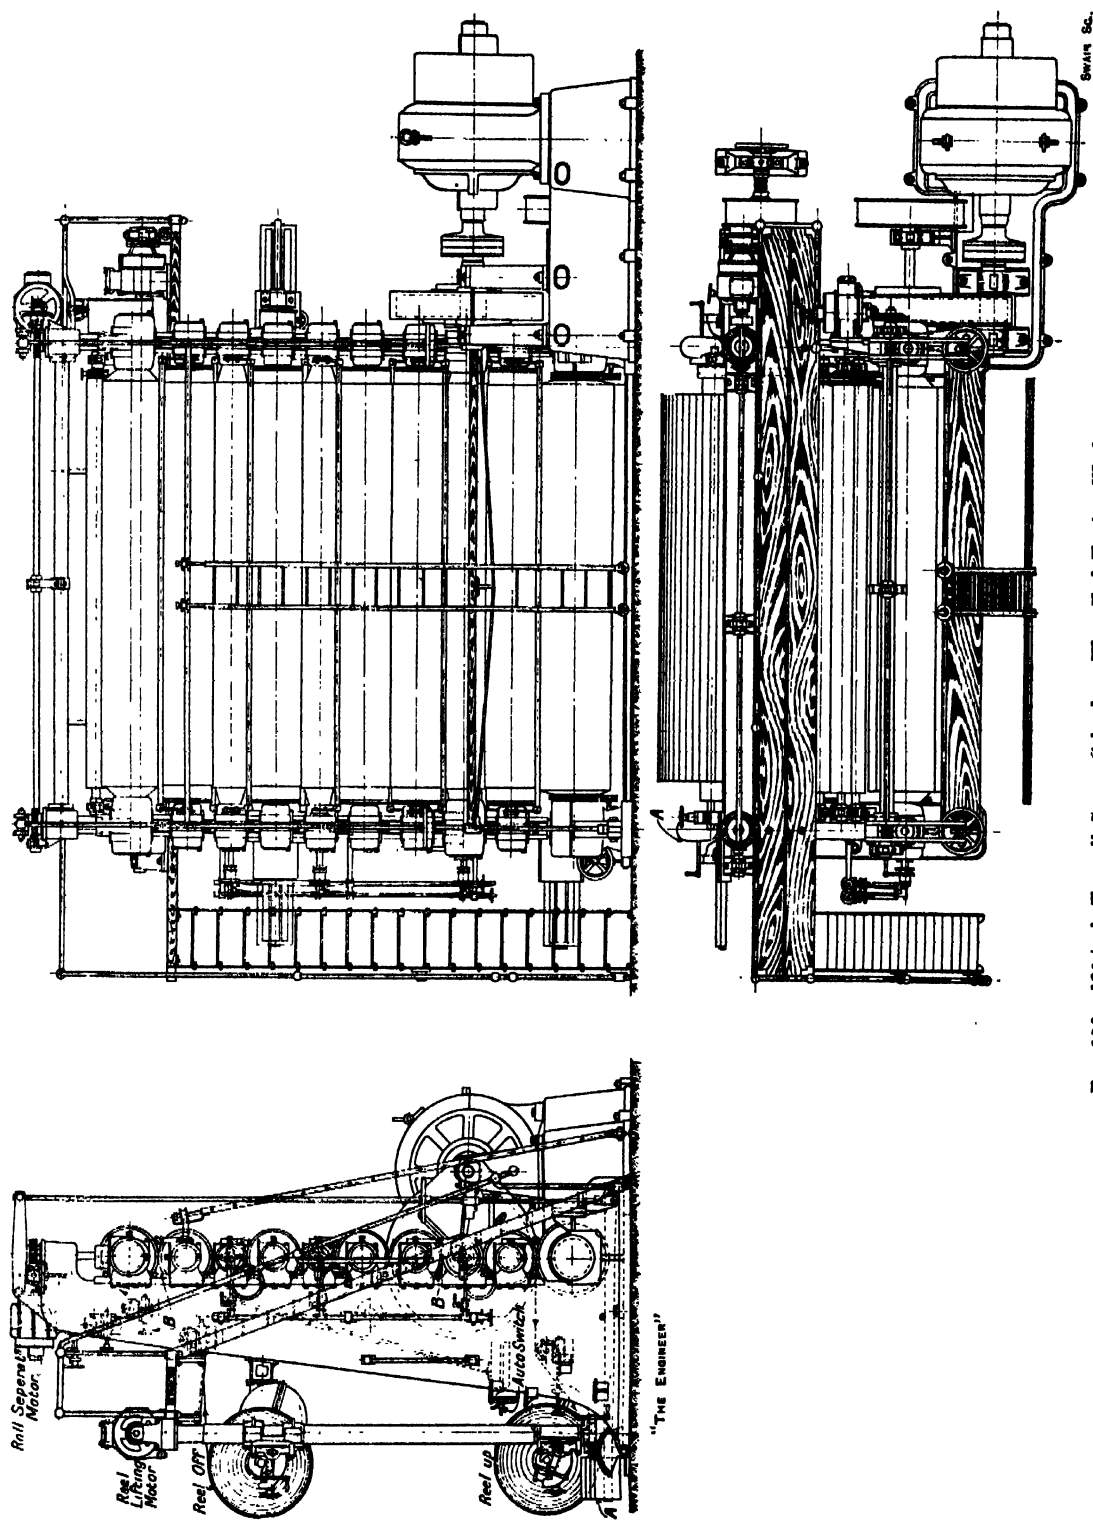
130-inch Ten-roll Super Calender.—West End Engine Works.
